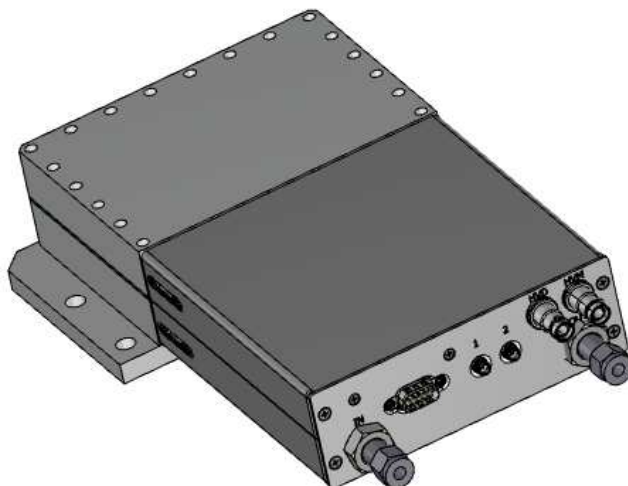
nBLM gas chamber with Faraday Cage. We can see the final connectors placed on the closing face of the Faraday Cage.
